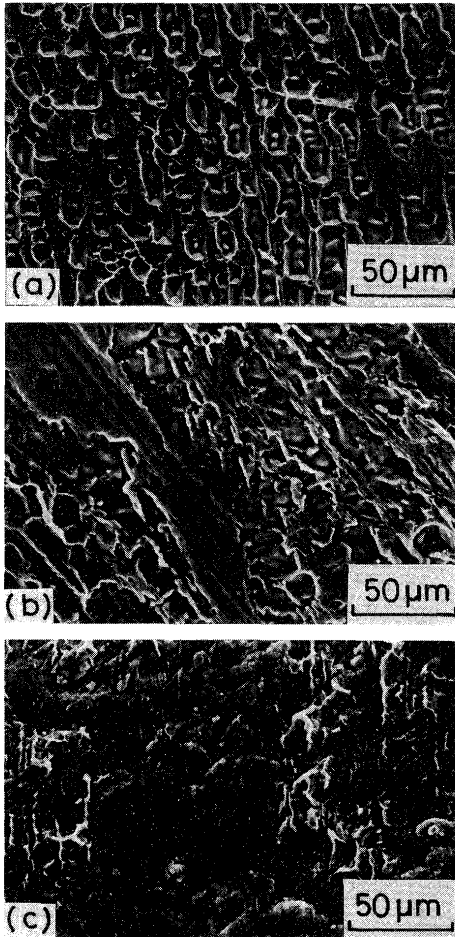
Fractured surfaces of joints of titanium to 4N aluminum welded at 873K and 903K ( $P_b = 0.5$  MPa,  $t_b = 1.8$  ks): (a) aluminum side of the joint welded at 873K, (b) aluminum side and (c) titanium side of the joint welded at 903K.
